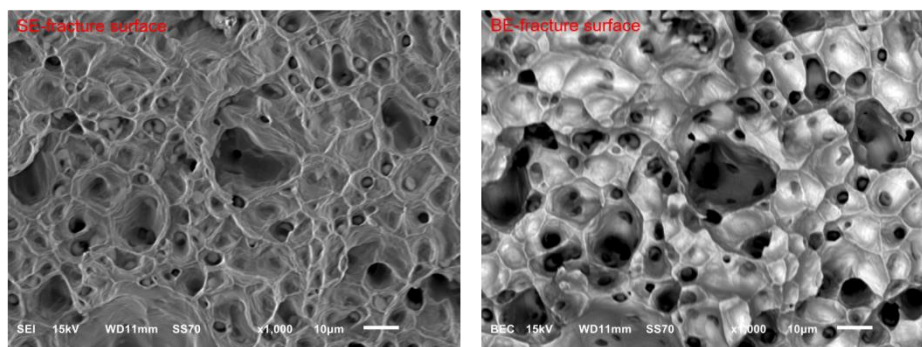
SE and BE images of 316L stainless steel tensile fracture surface.
